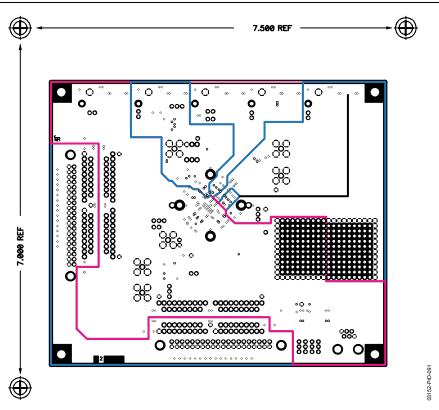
PCB Assembly, Layer 2 Metal (Ground Plane)
